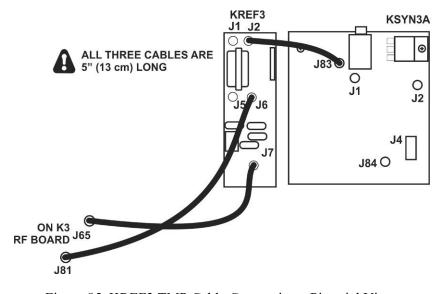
KREF3 TMP Cable Connections, Pictorial View.
